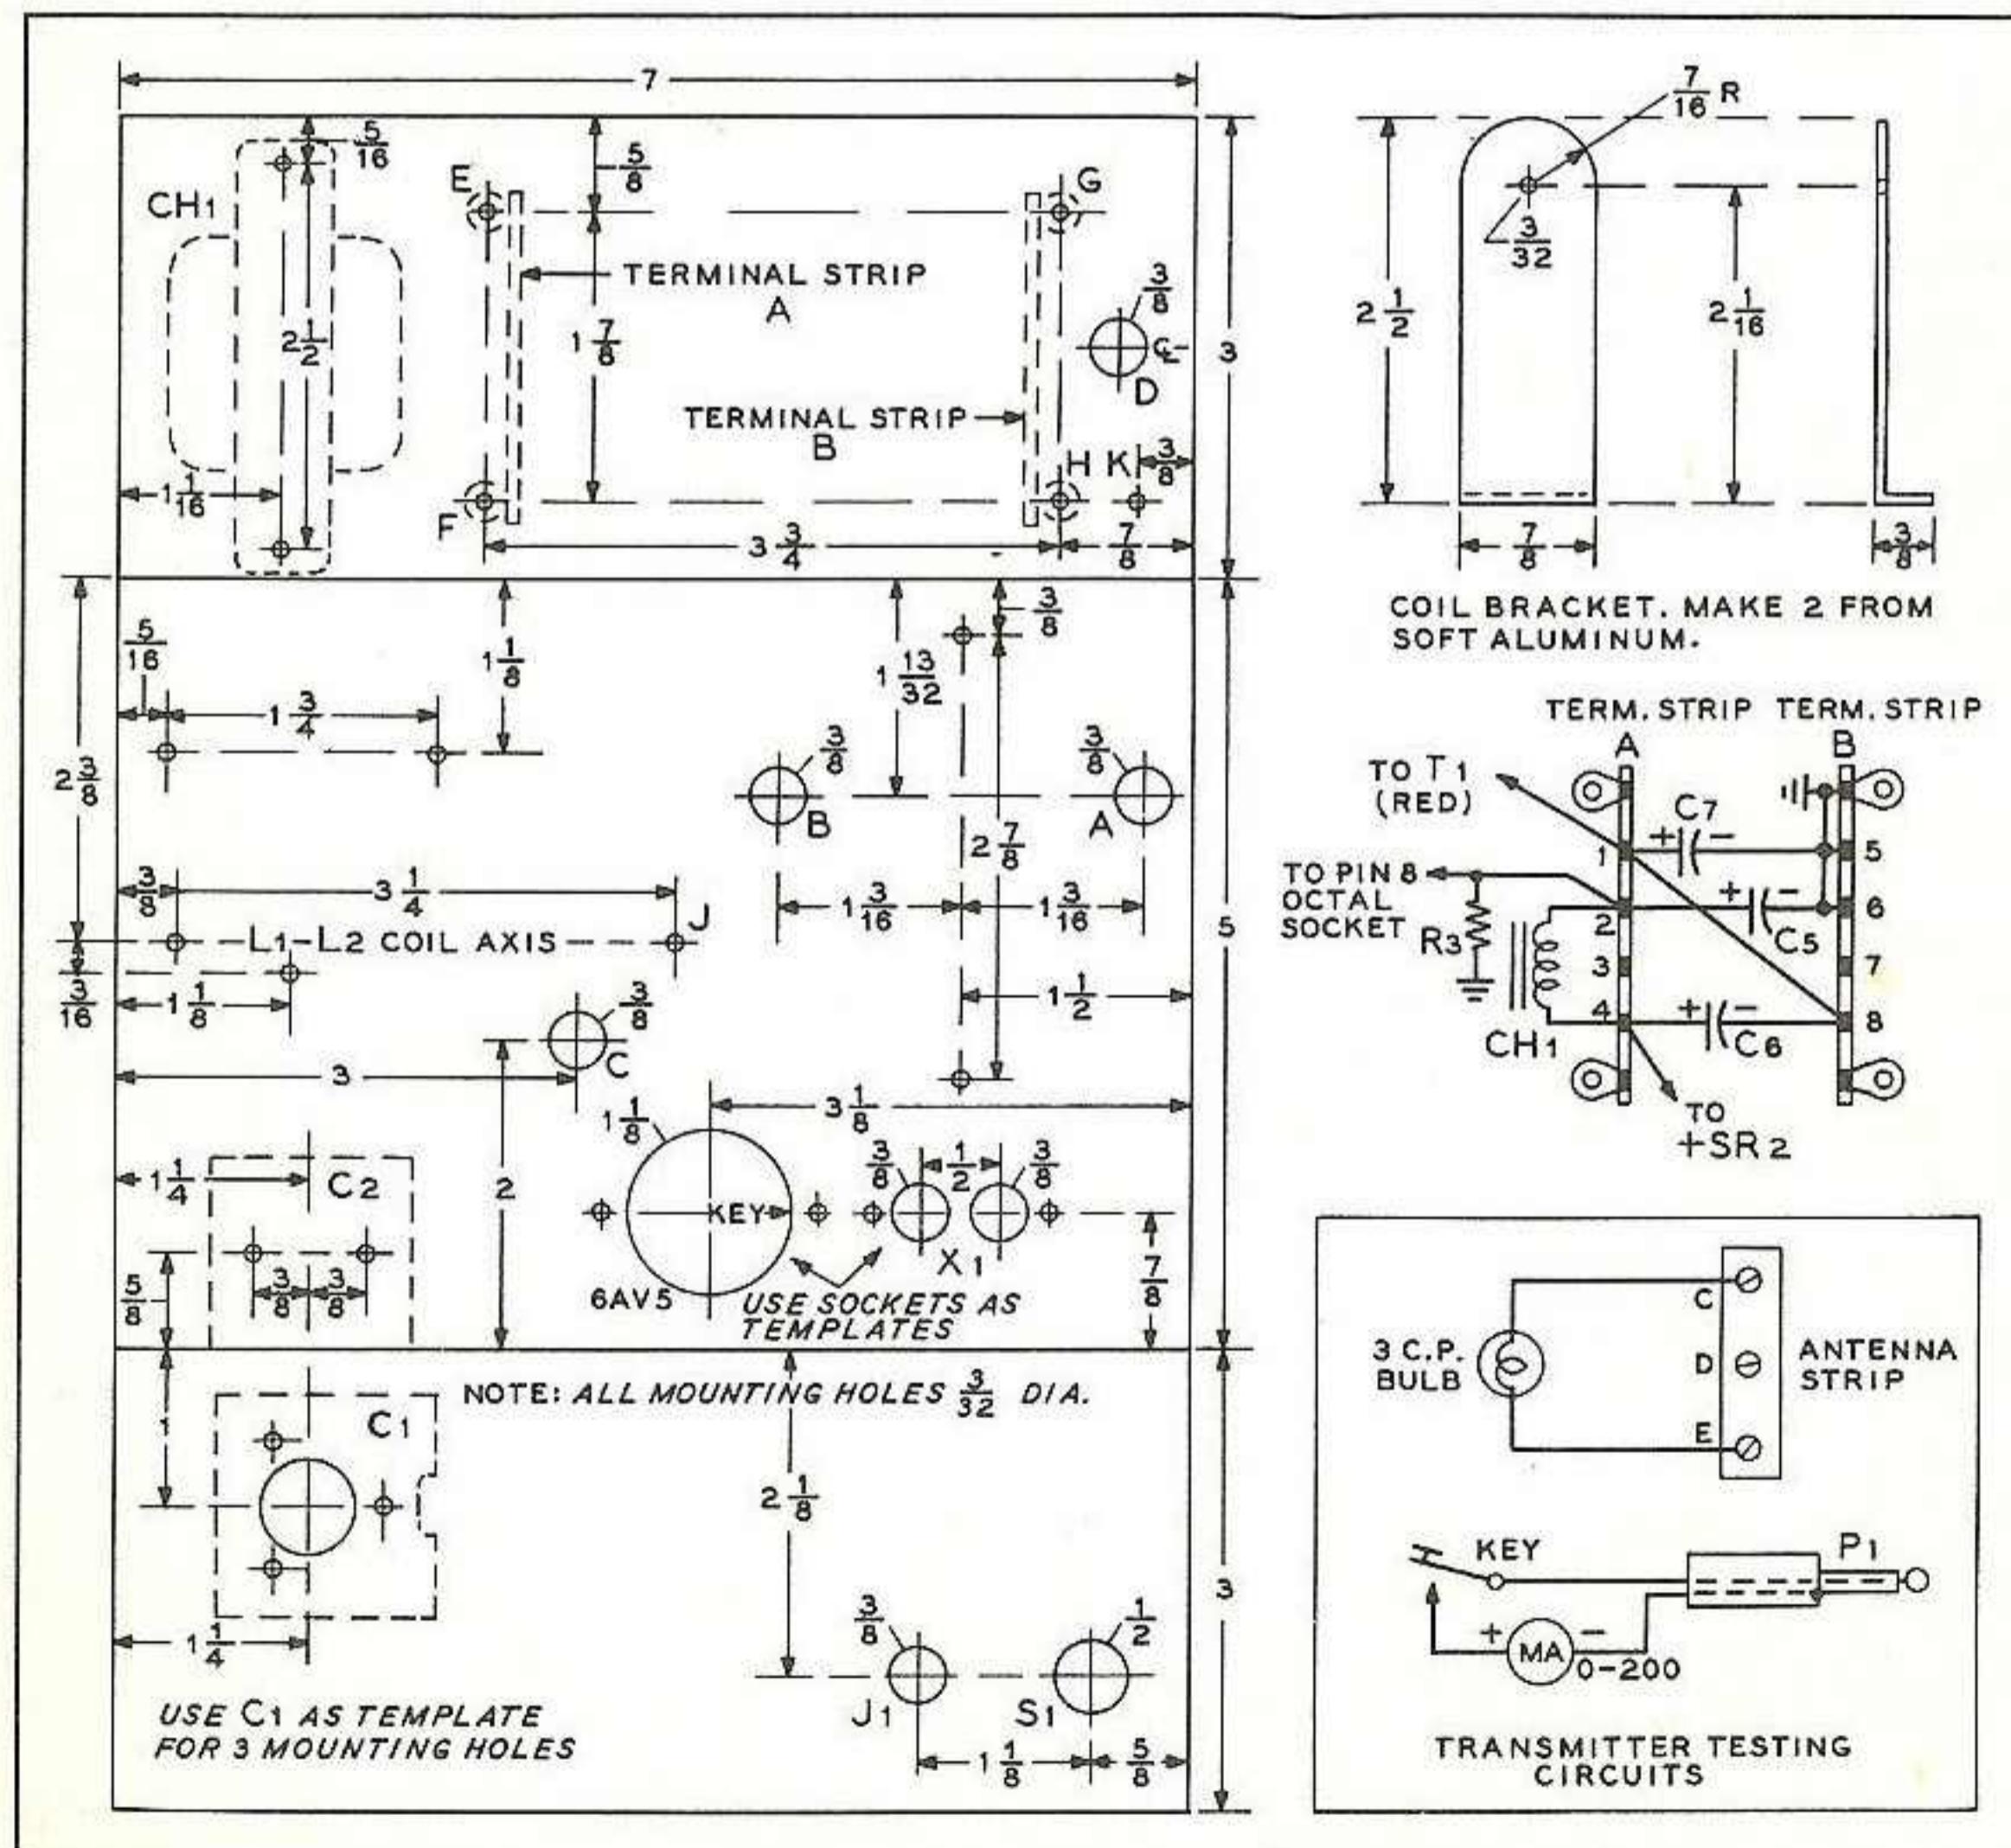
Parts layout and chassis template for LJ-15 transmitter. Coil brackets for L1-L2 are shown at upper right. The test circuits are shown at the lower right.
